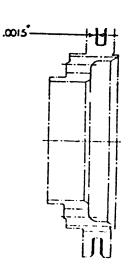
Crankshaft Goar Hub Pasts No. 28008, 28013, 68047
